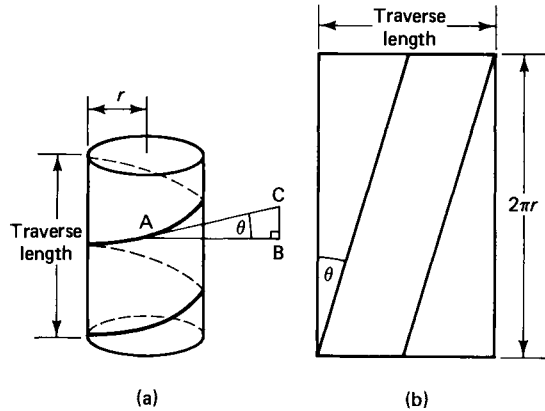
Angle of wind (a) Instantaneous direction of winding AC on package surface. (b) Outer layer of package surface opened out flat.
